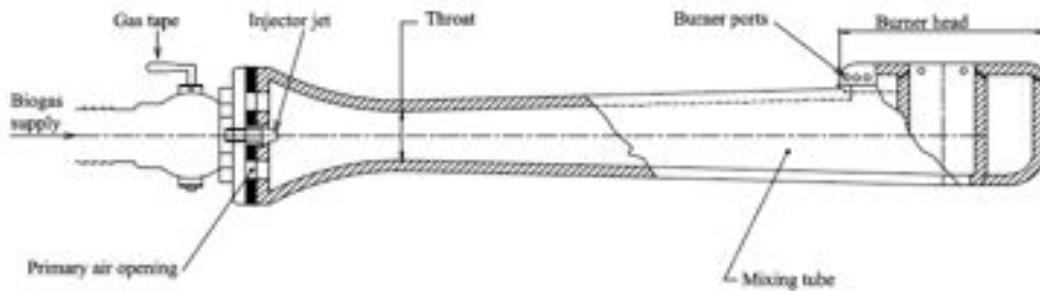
Assembly of Typical Burner for Biogas Cookstove
